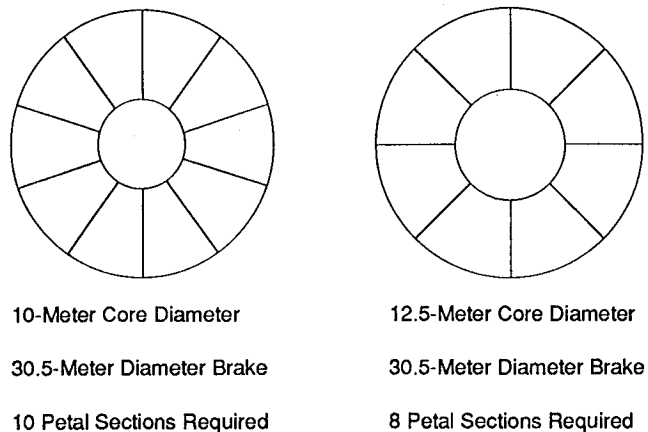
Rigid Aerobrake Petal Layout
